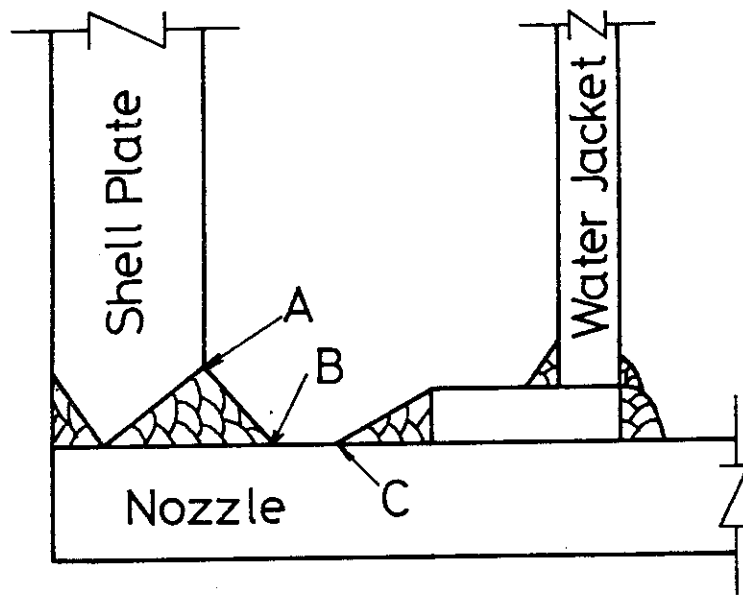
Inspection Parts of Fillet Welding Seam
